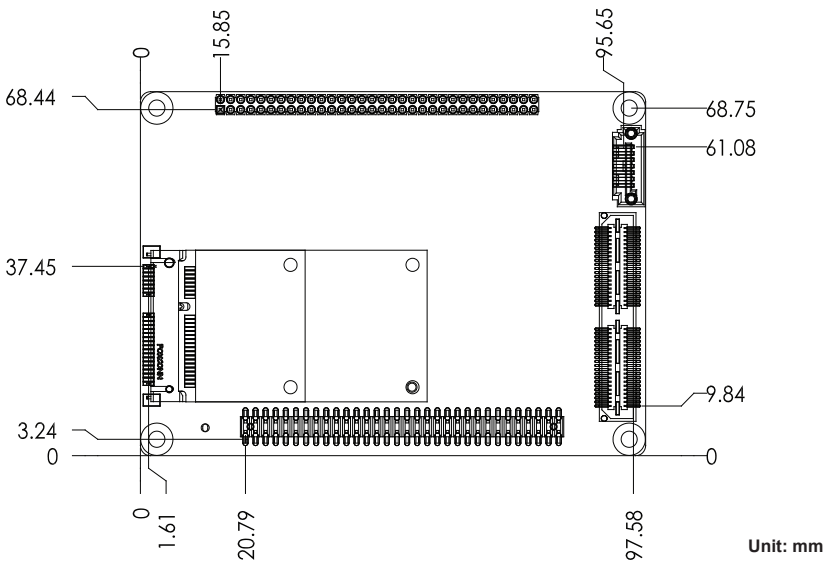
MIO-3260L Mechanical Drawing (Bottom View)
